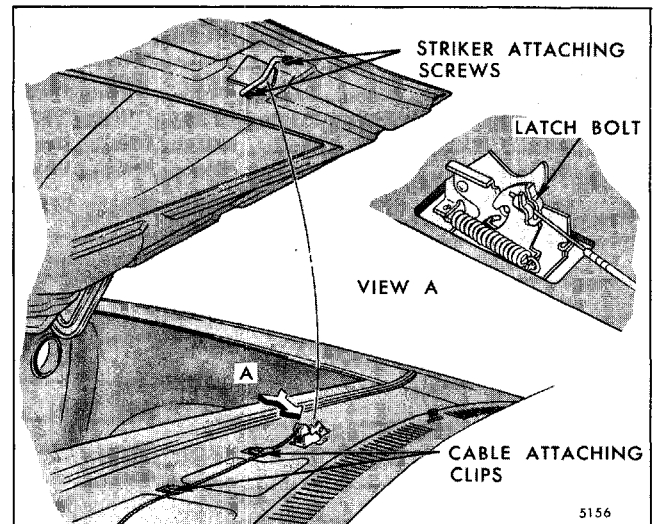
Hood Latch and Hood Latch Striker - "H-11, 15 and 77" Styles
